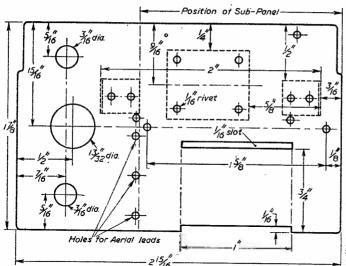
Drilling details of the chassis (a panel of 1/16in. insulating material).
